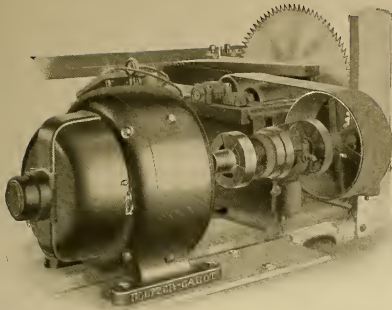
DRIVING A CIRCULAR SAW WITH A DUST-PROOF MOTOR MADE BY THE HOLTZER-CABOT ELECTRIC CO., BOSTON, MASS.
